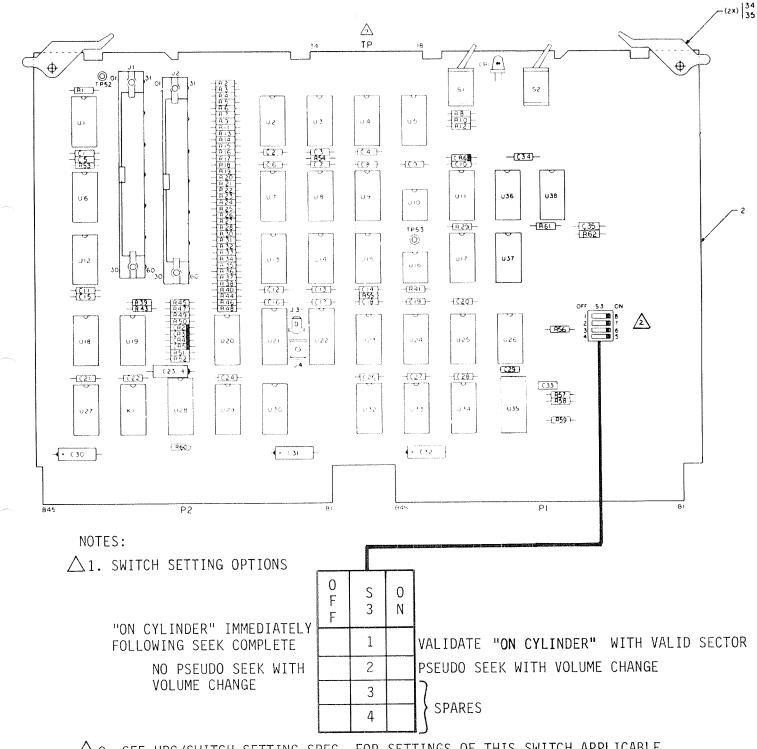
I/O CKT BOARD (SHEET 4 OF 9) (ASM 77622501 ONLY)
